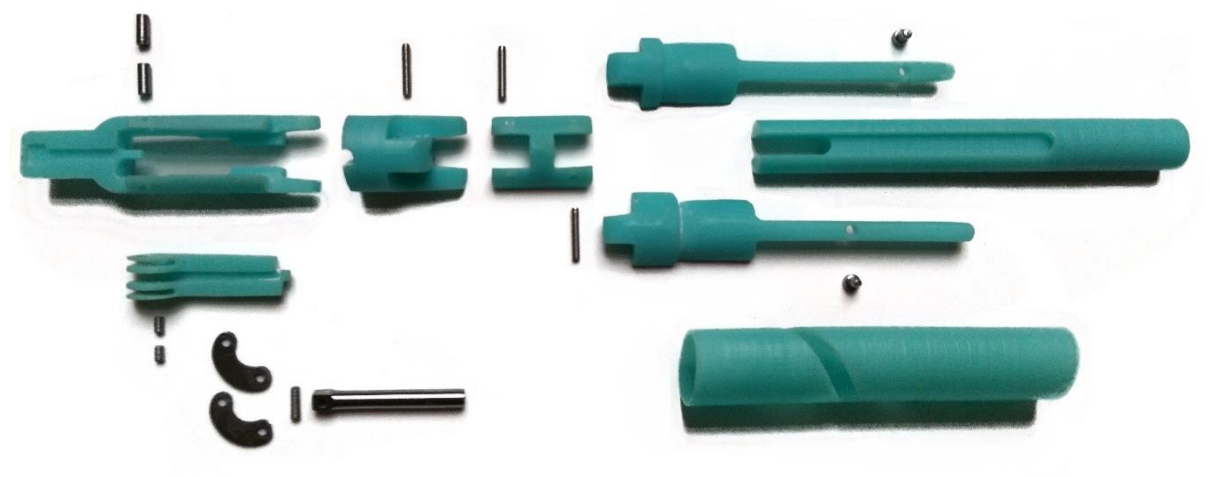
3D resin printed prototype of the final design, 200% larger than the original.
